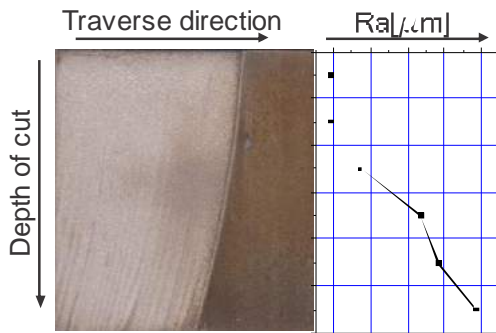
Changes of appearance and quality of machined surfaces by abrasive water jet, depending on the depth of cut
